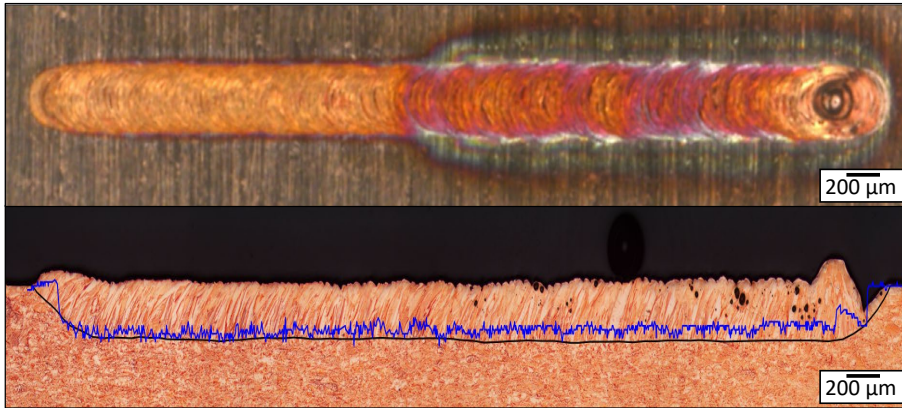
Weld seam with a corresponding longitudinal cross section for a laser power of 1500 W and a welding speed of  $500 \frac{\text{mm}}{\text{s}}$ .
